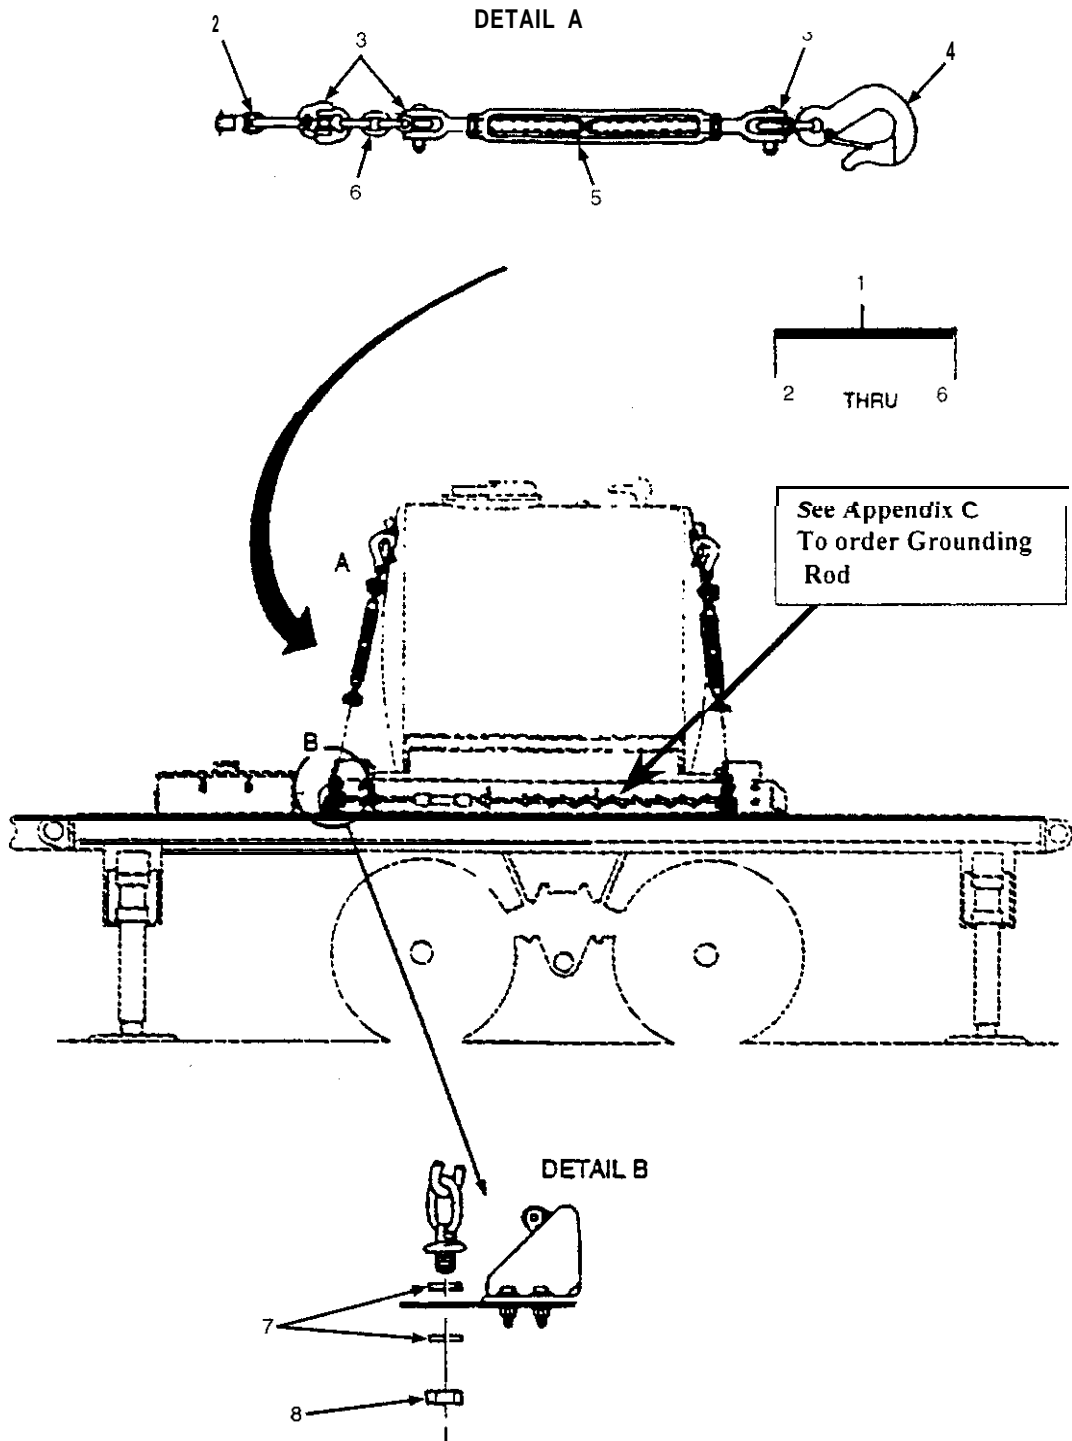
Hold Down Assembly (Sheet 1 of 2)
